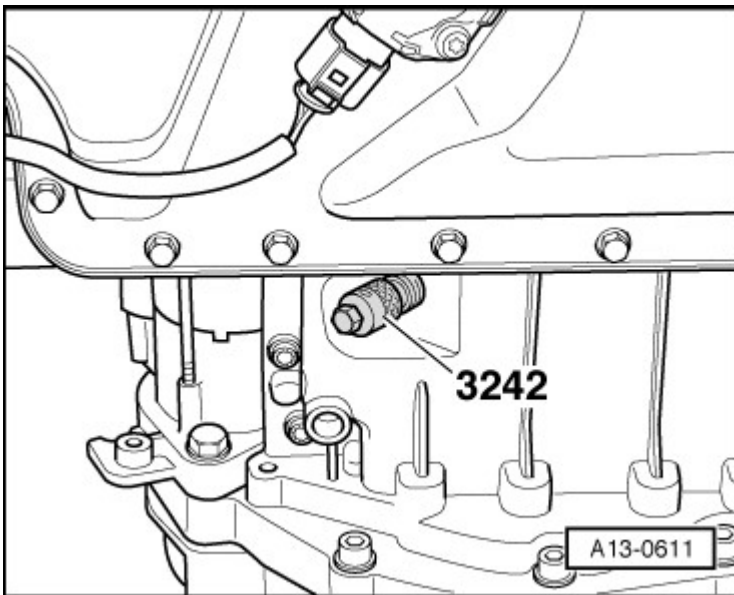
Identifying Crankshaft Holder 3242 Into Hole, Removal/Installation
